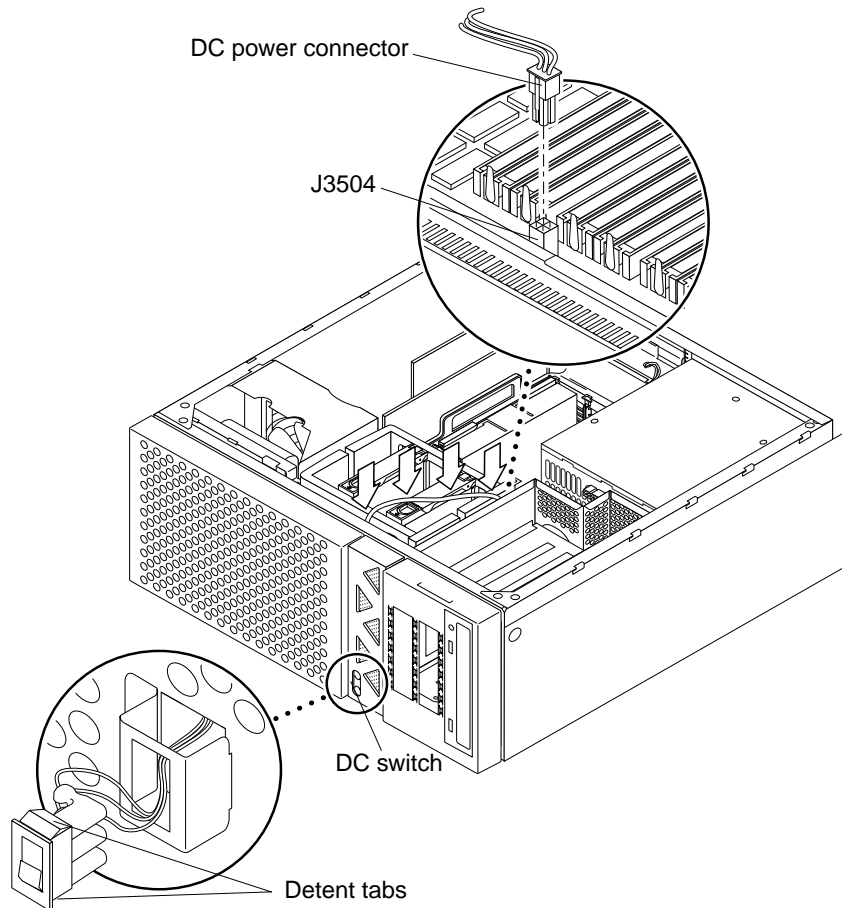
Removing and Replacing the DC Switch Assembly
